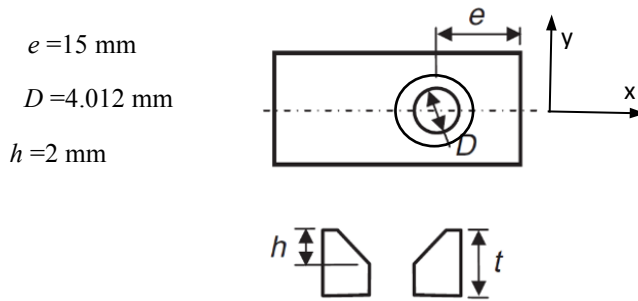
Specimen dimensions for bearing failure mode, [27]
